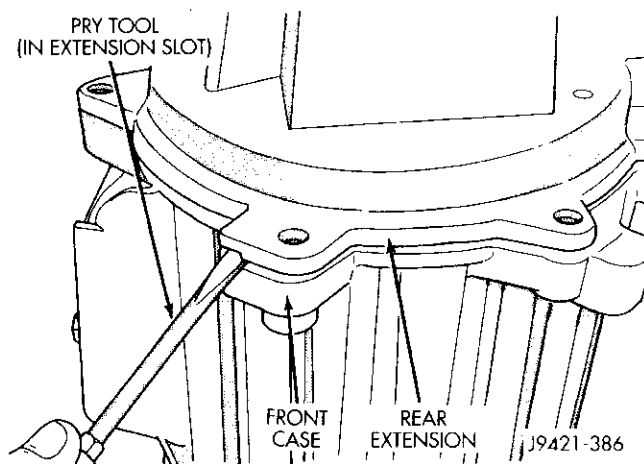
Loosening Rear Extension (Breaking Sealer Bead)
